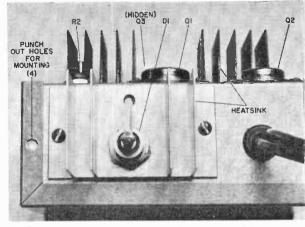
The layout of the author's design provides proper spacing of mounting dimensions to give finished product good appearance and balance, while providing greater ease during wiring and assembly.
